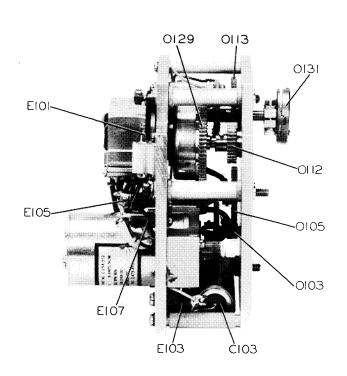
Transceiver 618S-1, Front Panel, Servomotor Drive Assembly, Right Side View
